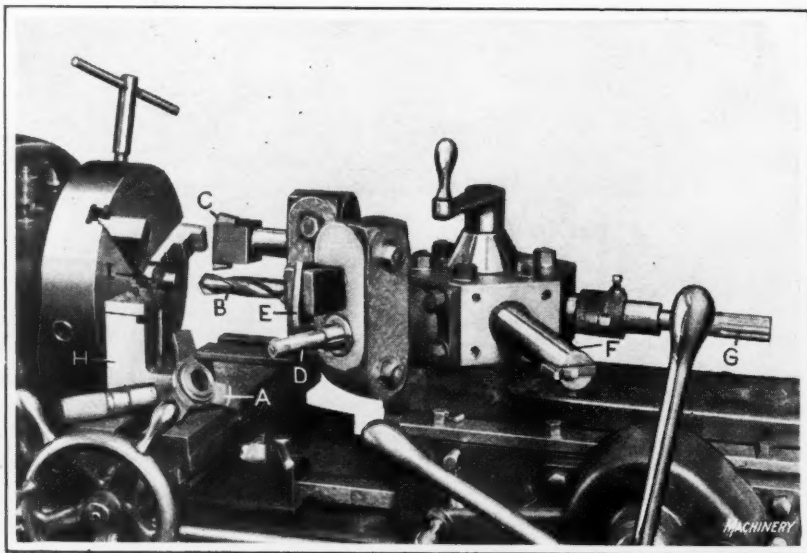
Equipment for machining Hubs of Fan Driving Pulleys
